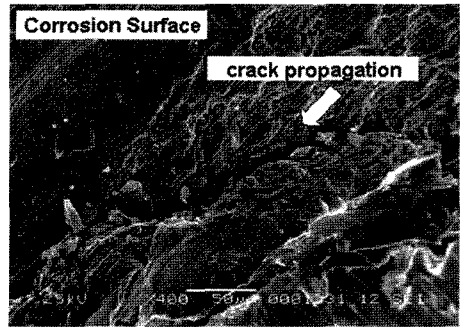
Fatigue crack propagation of messenger wire(SEM)
